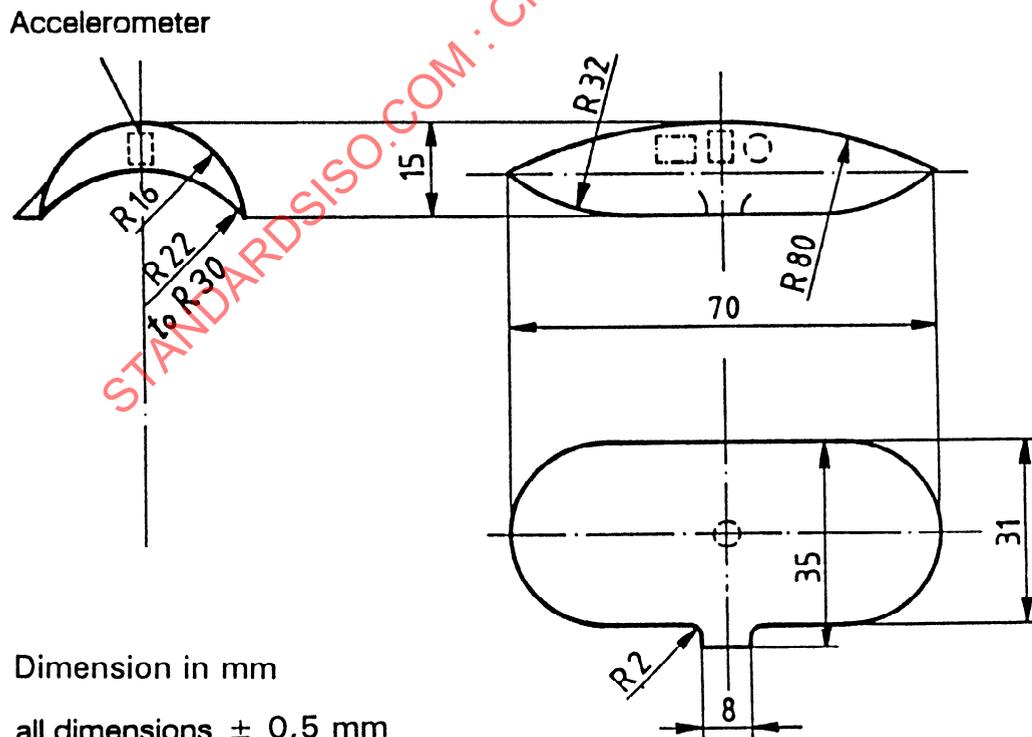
Adaptor for holding accelerometer in the palm of the hand
